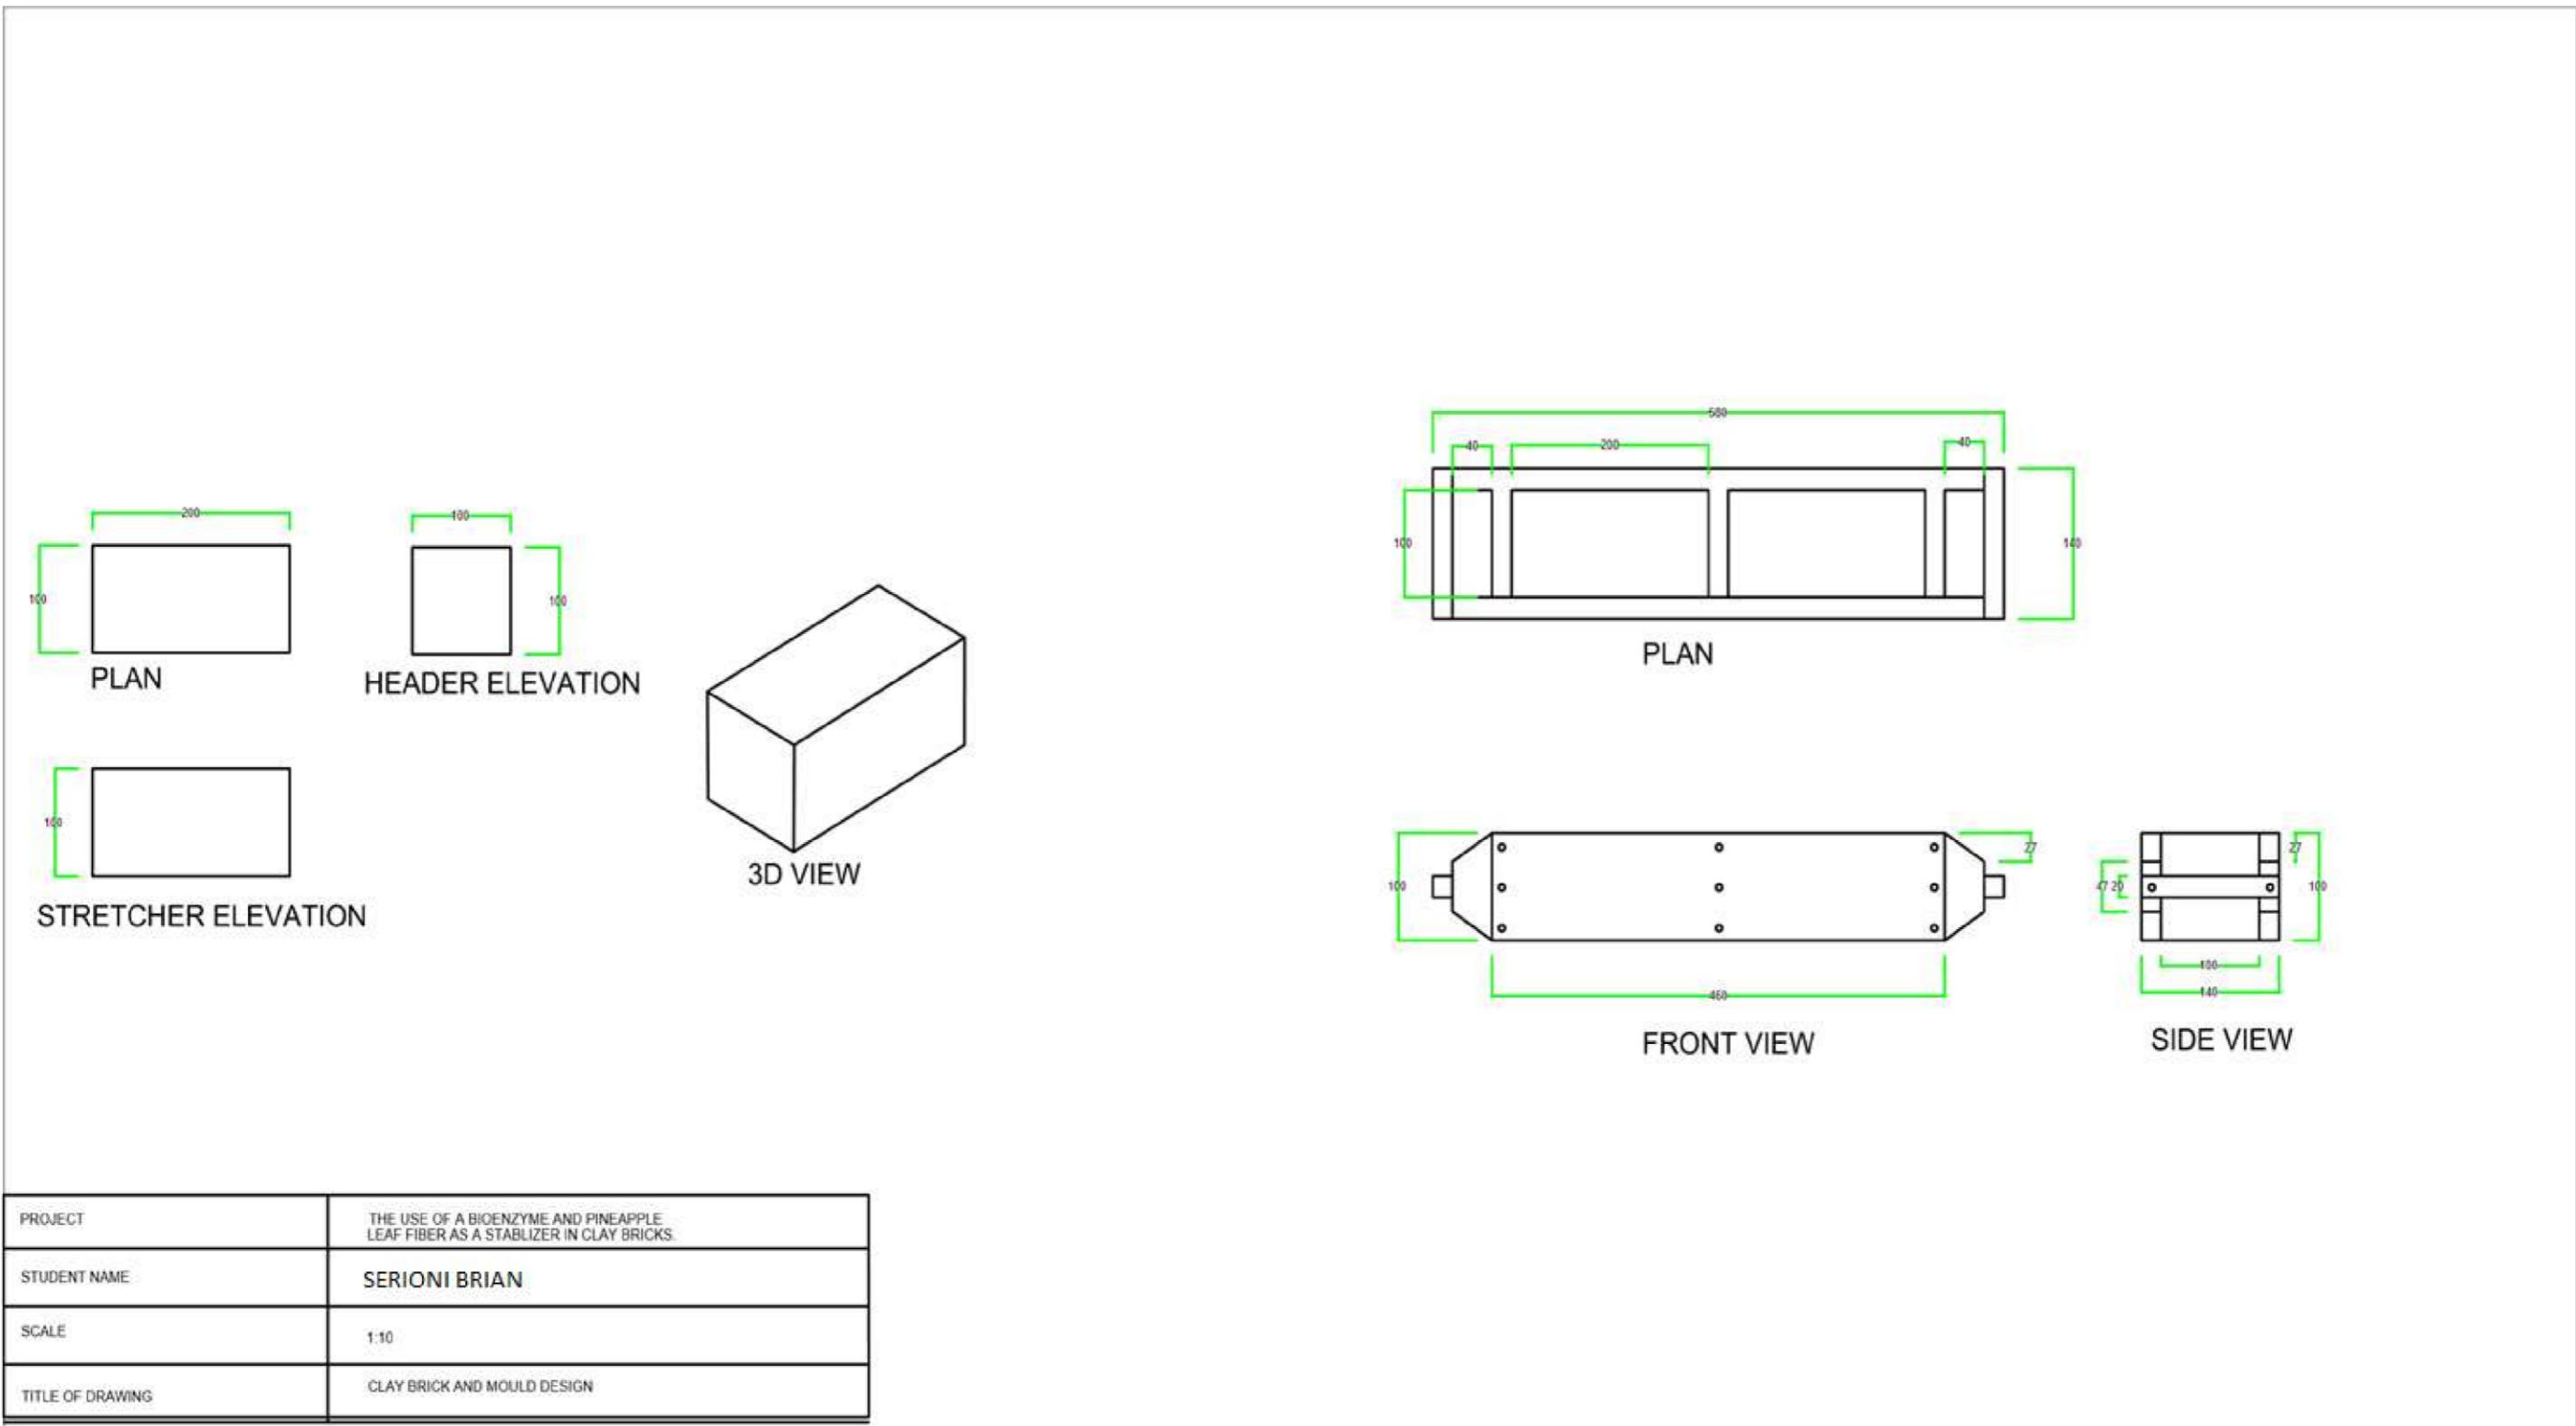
DESIGN OF CLAY BRICK AND WOODEN MOULD
